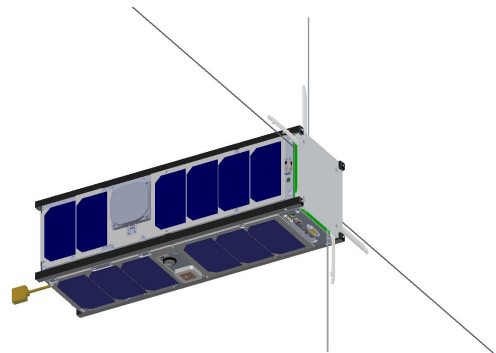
Body mounted solar panel arrangement (left side -Y, bottom)
